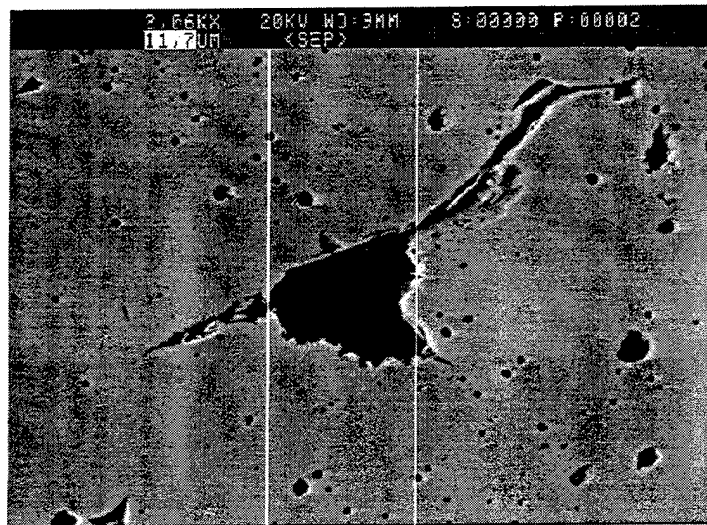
Porosity and Slag seen in UWW31 weld sample.
